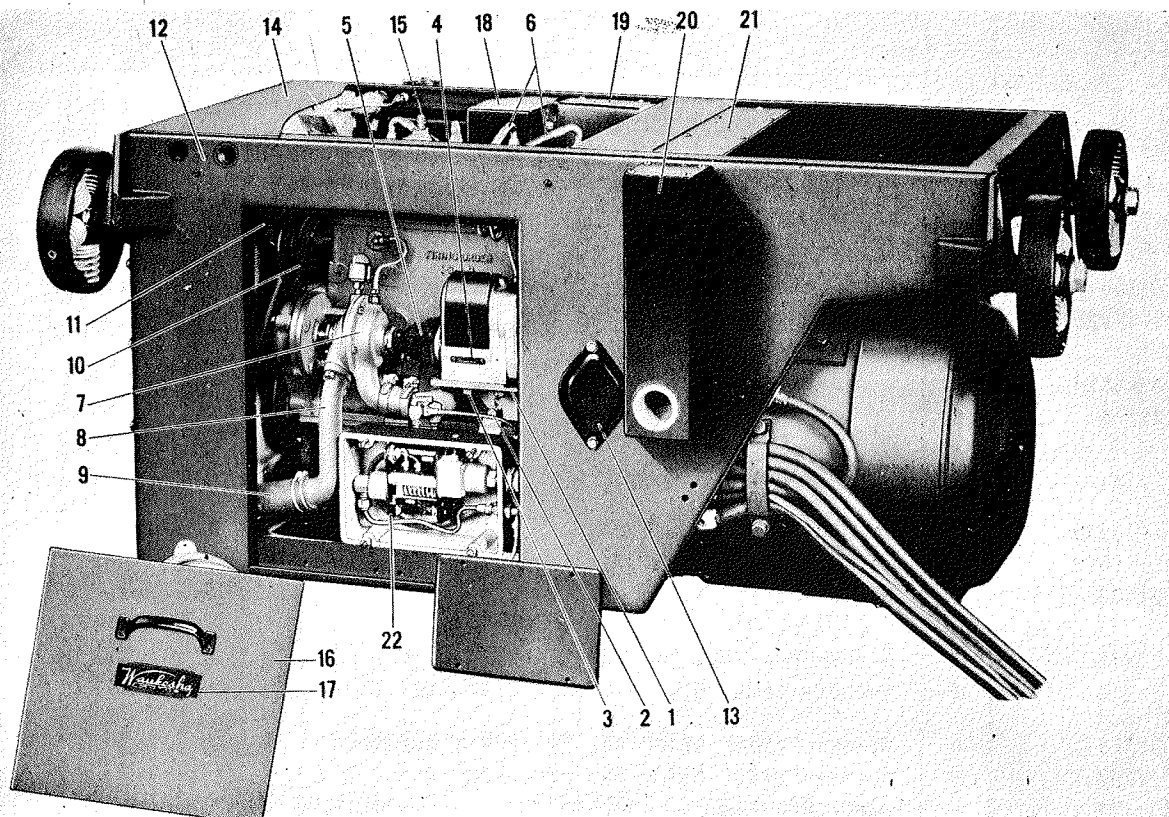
MAGNETO SIDE VIEW OF ENGINE-GENERATOR
